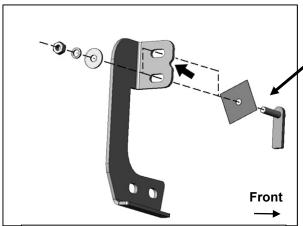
Remove rubber plugs from driver/left #3, #4 and rear mounting locations (arrows). Insert 8mm Small Bolt Plate with Plastic Retainer into mounting holes
